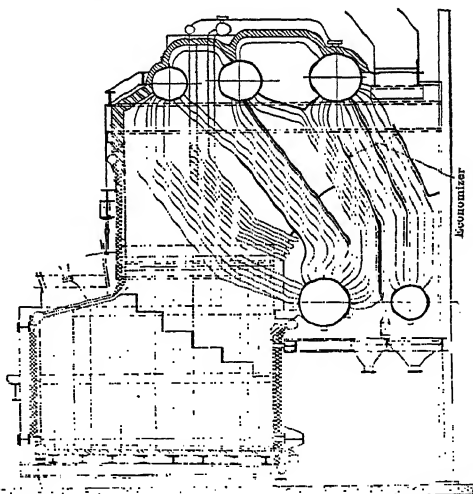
Stirling Boiler Equipped with Integral Economizer
